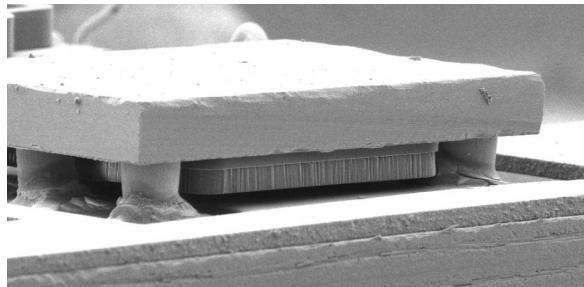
BAW WLP part soldered on a substrate, before overmolding
